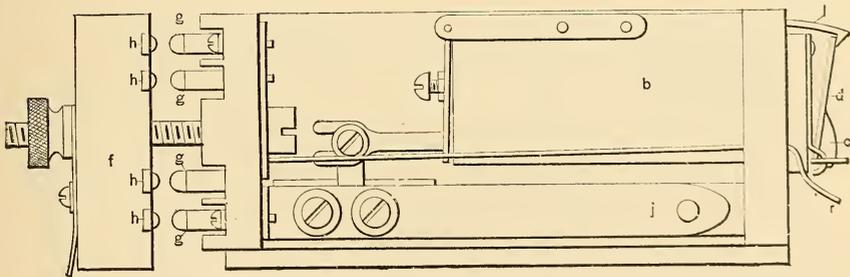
SIDE ELEVATION AMERICAN DROP AND JACK.
